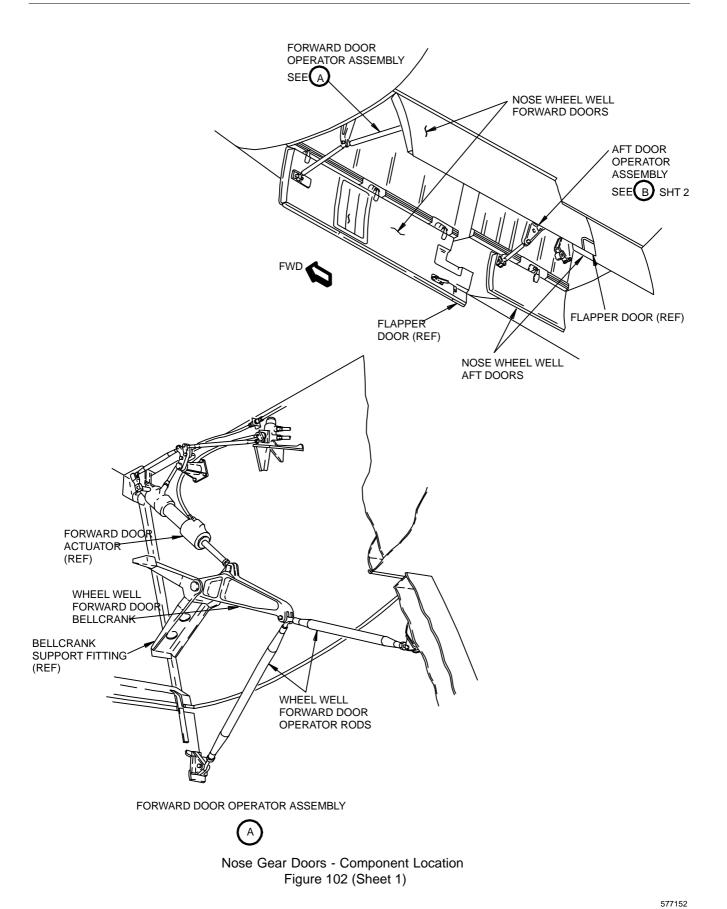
32-22 Nose Gear Doors Comp. Location Fig. 102 (Sheet 1)
